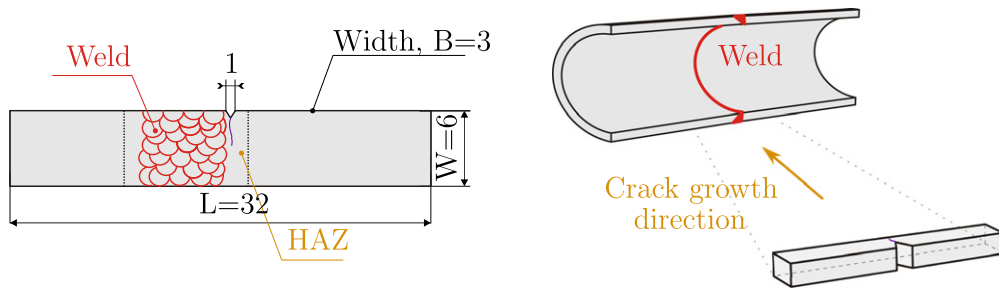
(Left) Small samples used for in situ tests; dimensions are in millimeters. (Right) Specimens were obtained transversally to the weld.
